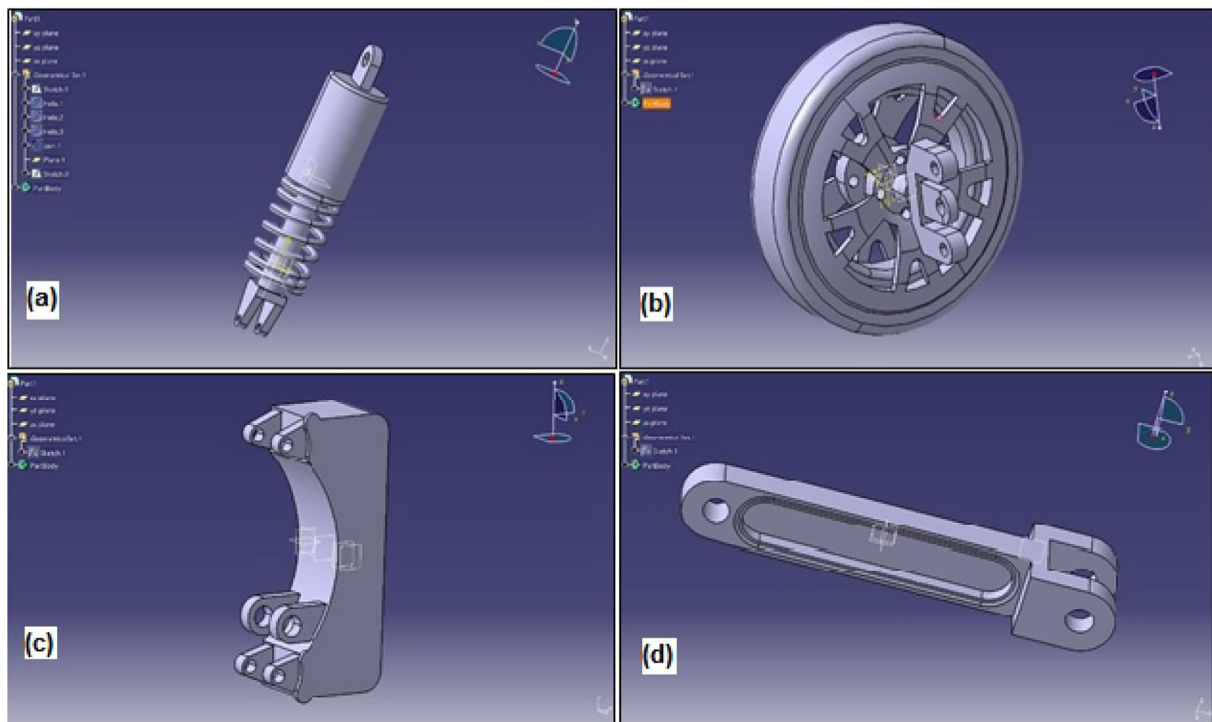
3D model of (a) spring damper (b) alloy wheel rim with tyre (c) frame (d) connector bracket.
